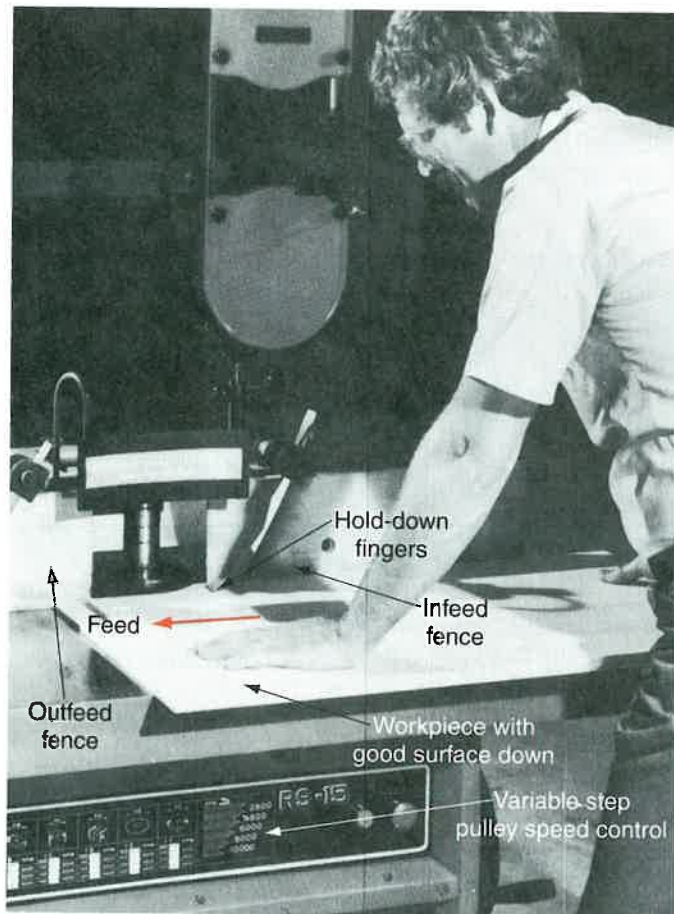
Shaping is the process of making contoured surfaces. (Black & Decker)
